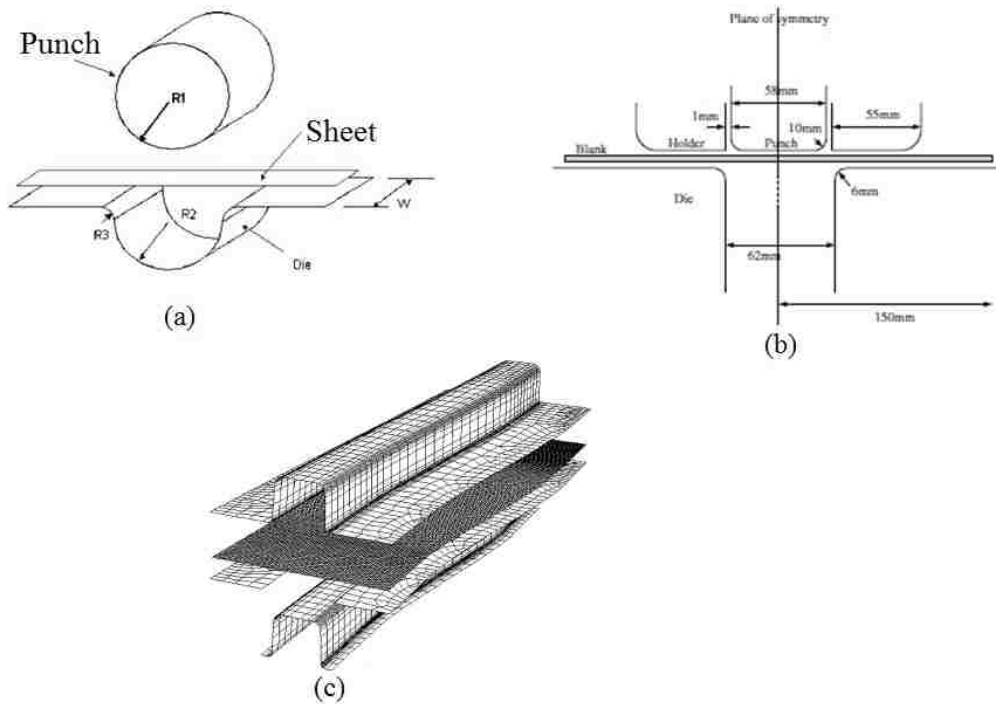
Schematics of (a)cylindrical bending test, (b)2-D draw bending test, (c)double-S rail, [13]
